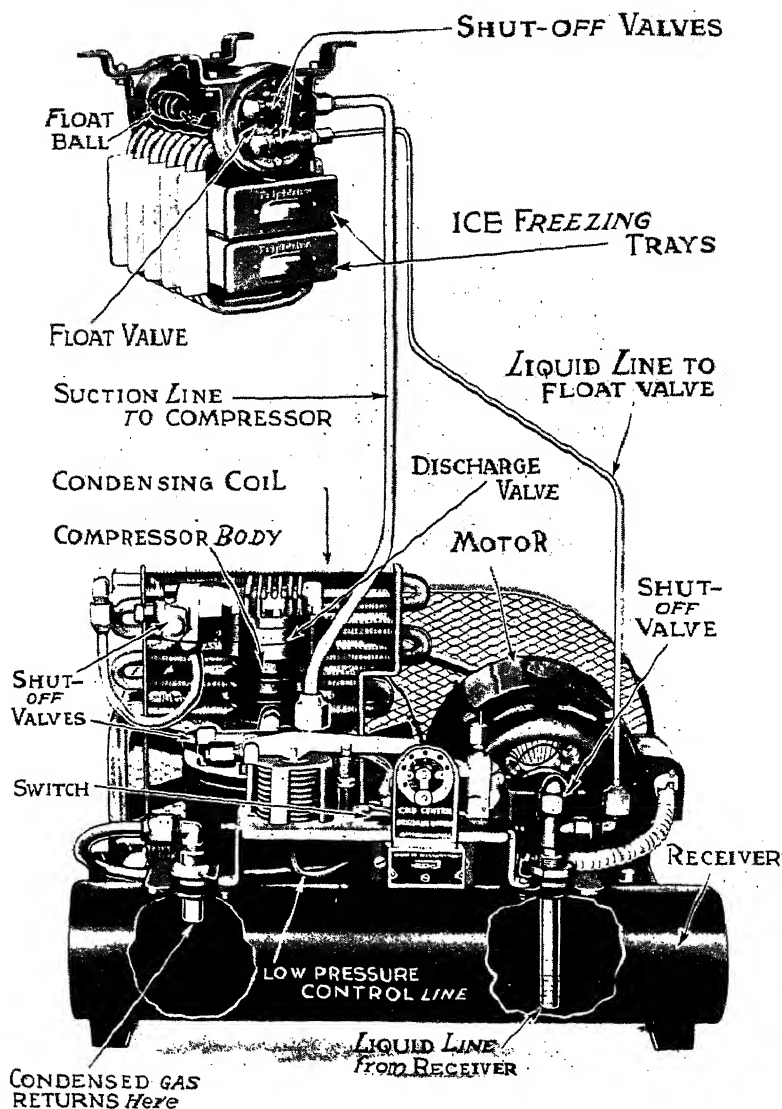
Complete air-cooled Frigidaire refrigerating unit.
